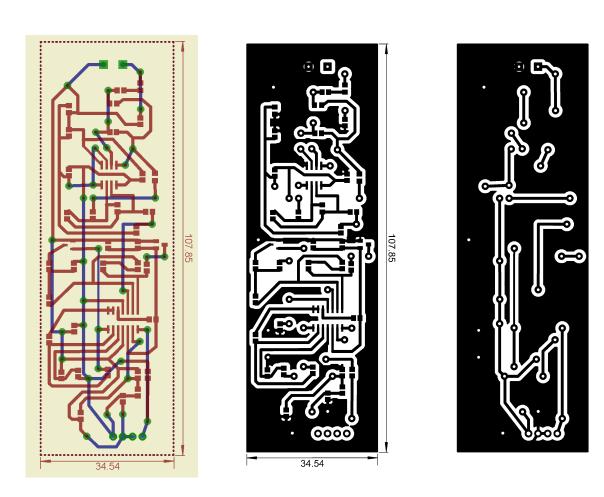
US receiver PCB layout (Eagle design, Top and Bottom)
